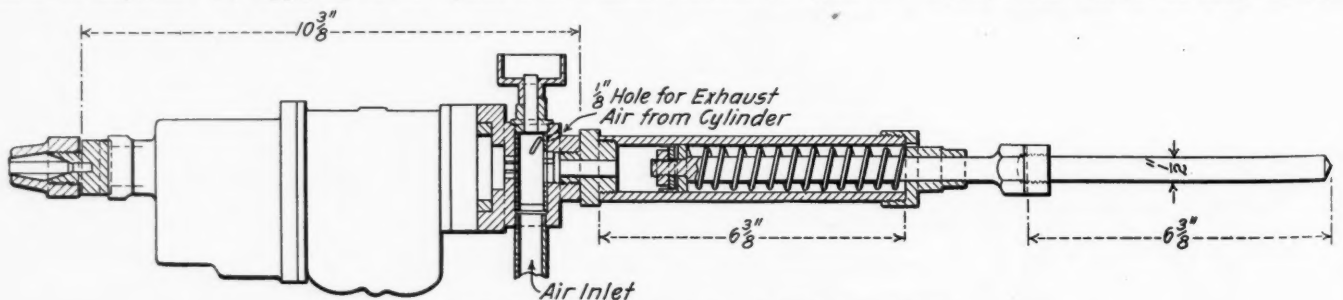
Cylinder Attachment for Air Motor. Kellogg.
